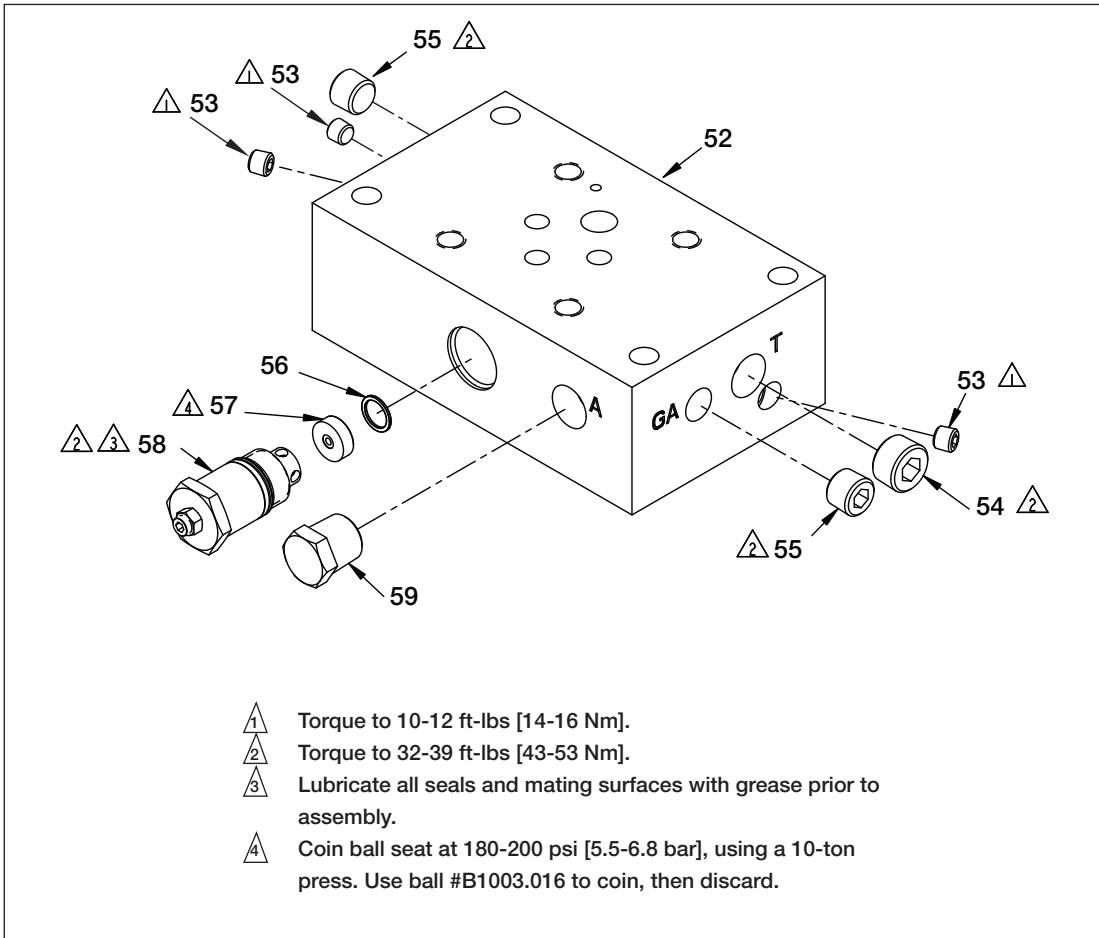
, Port Manifold Assembly, DC6245950SR, VE33VAC
